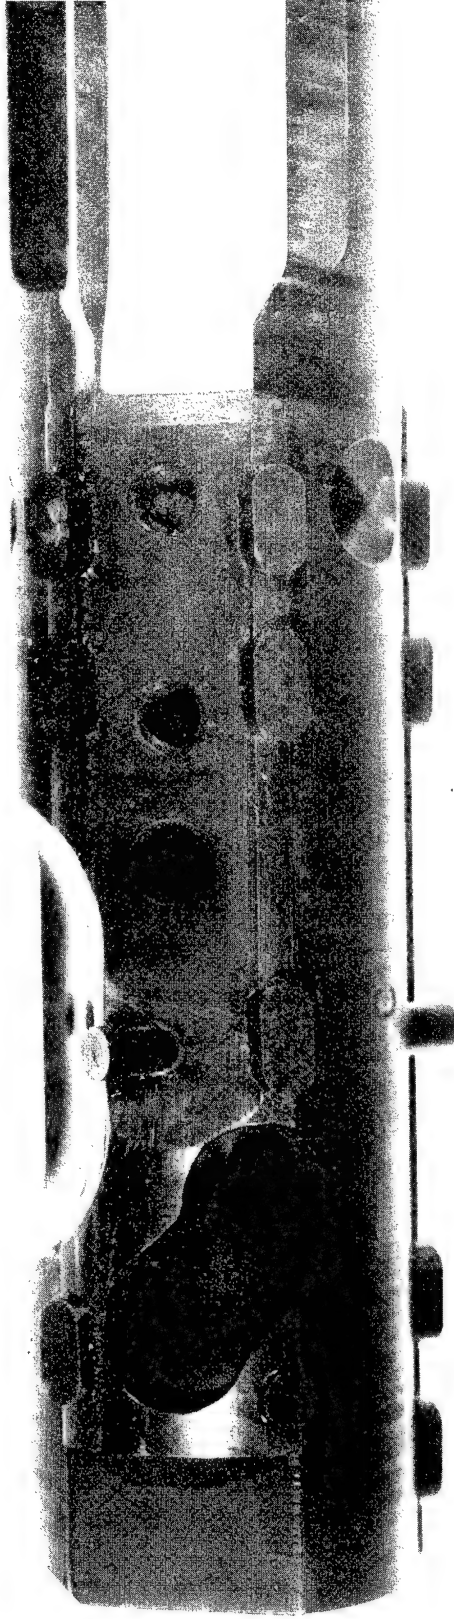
Left Side of Bolt Carrier Showing Inserts in Place.
